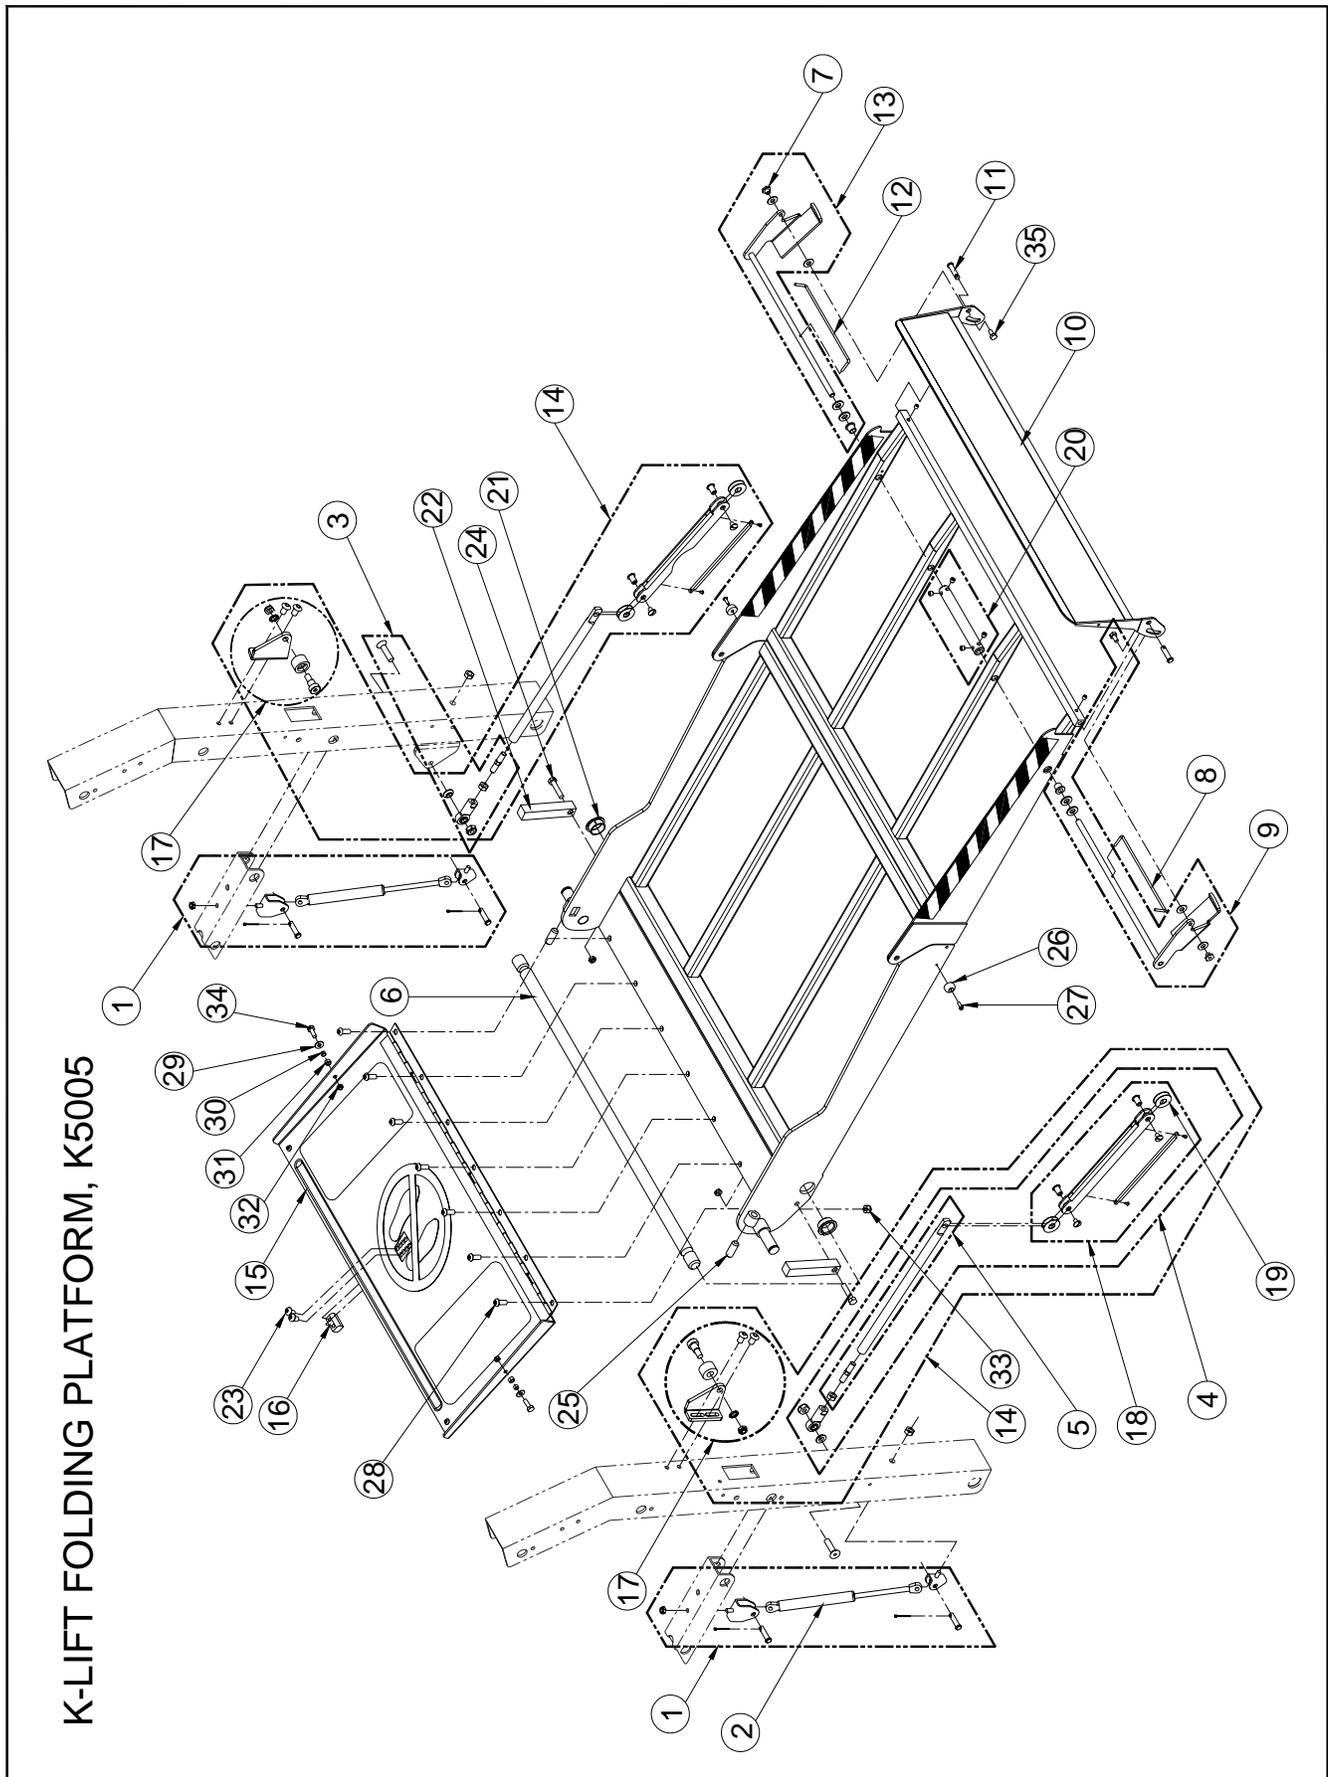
FOLDING PLATFORM ASSEMBLY, K5005
